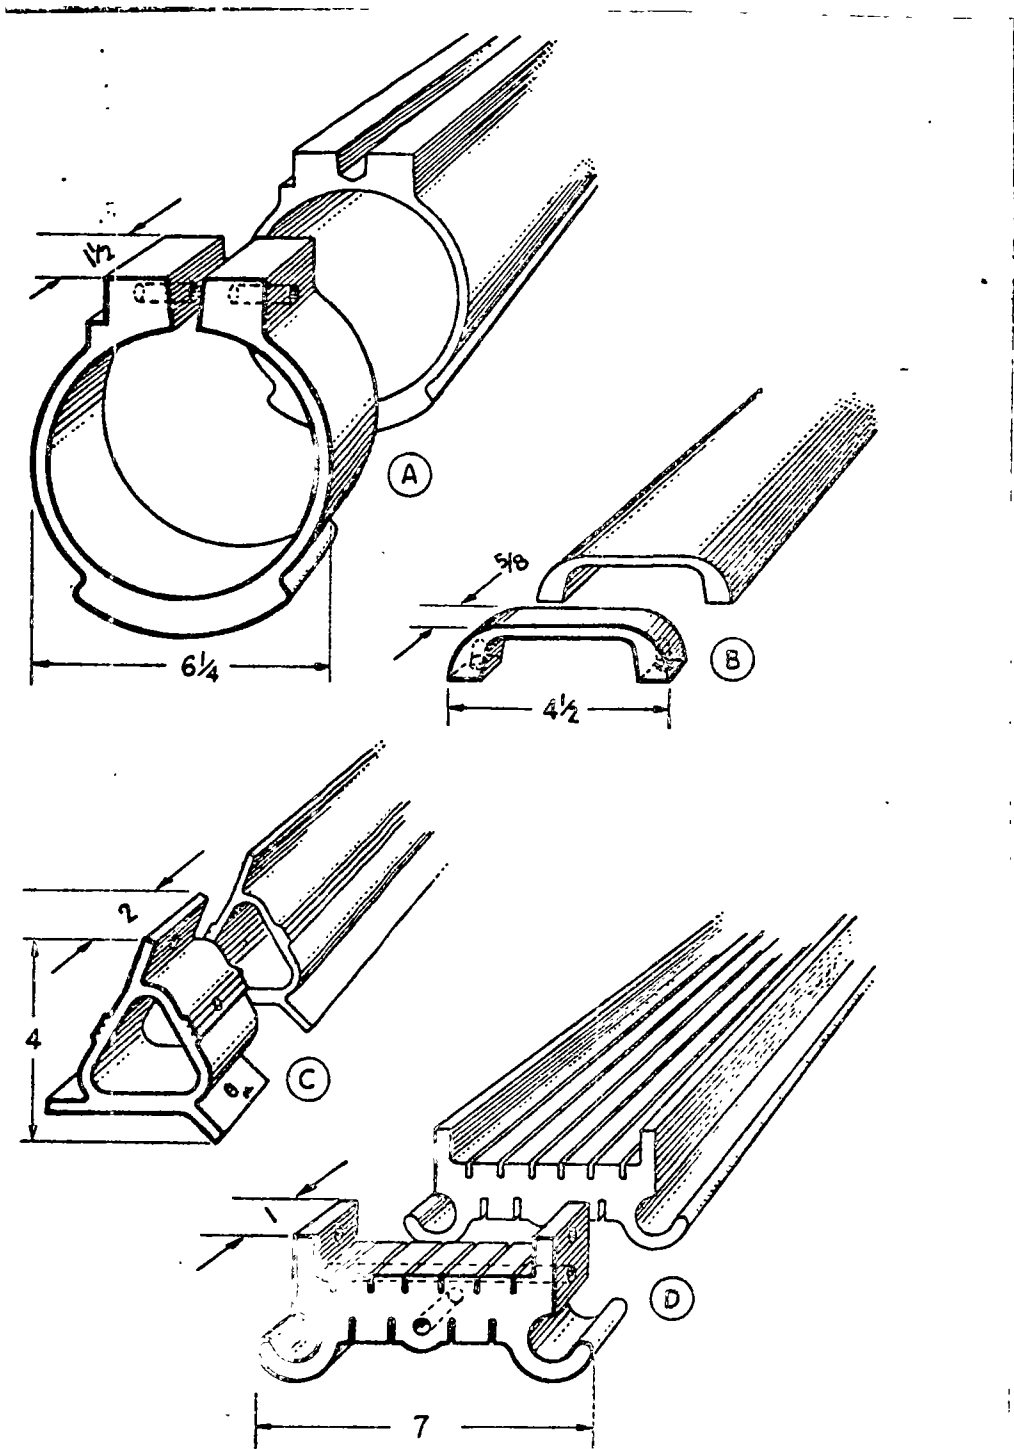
Short parts cut from extruded shapes are often cheaper than castings, forgings or parts machined from bar stock. Examples illustrated are A—clamp for coupling for aluminum irrigation tubing, B—drawer pull, C—clamp for tripod, D—loom part.
